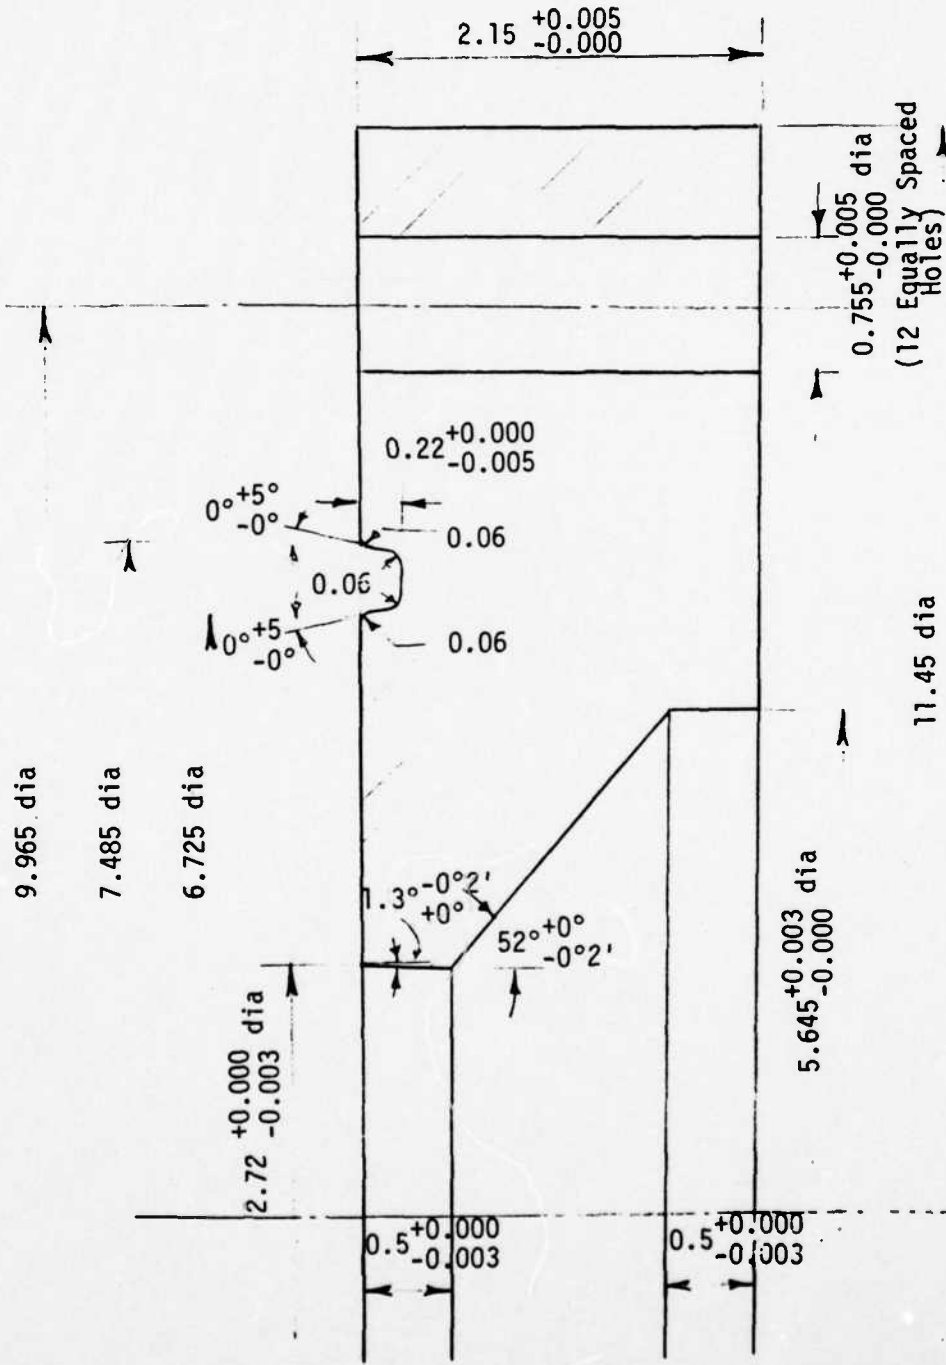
Detailed Working Drawing (Cross Section) of the Left Backing Jaw
